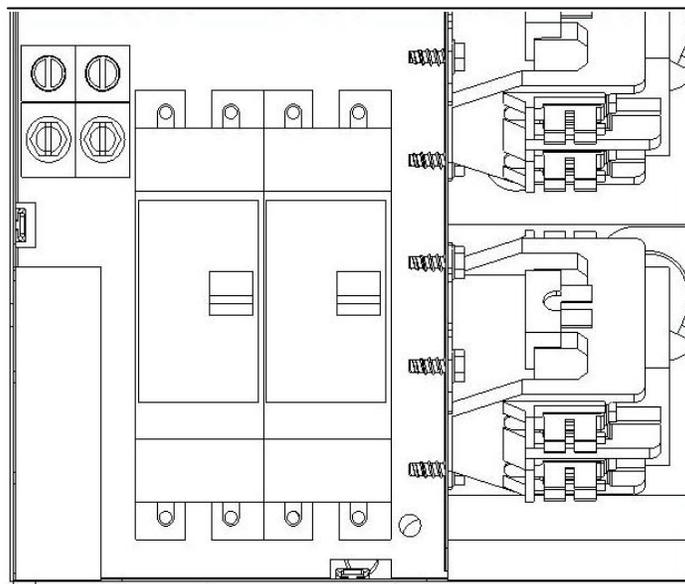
MSPS Control Box Circuit Breaker and Component Locations. Transformer is behind breaker plate.
